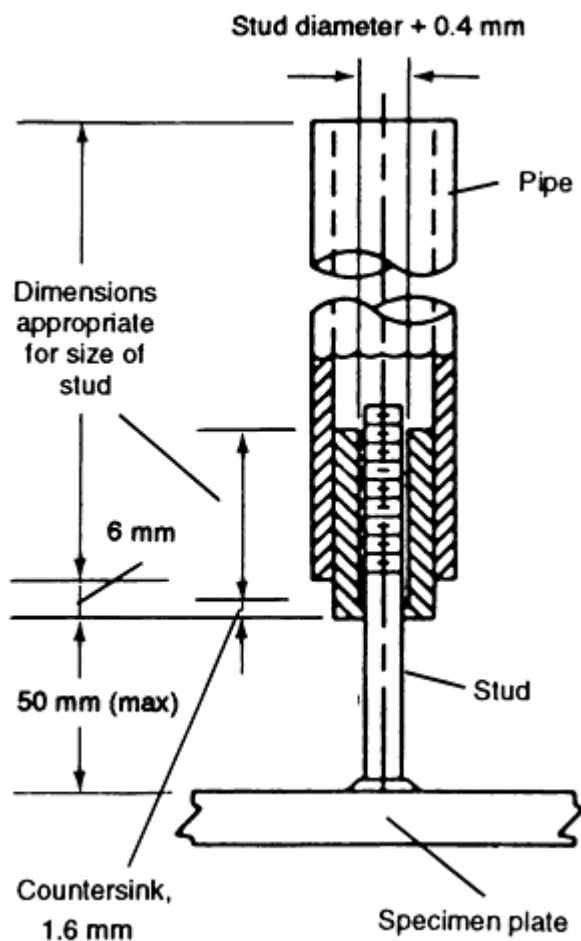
TYPICAL BEND TESTING SETUP. STUDS THAT MUST UNDERGO APPLICATION QUALIFICATION SHOULD BE BENT 90° WITHOUT WELD FAILURE (15° FOR ALUMINUM STUDS). TESTING FOR PREPRODUCTION OR TESTING DURING PRODUCTION FOR INSPECTION PURPOSES REQUIRES BEND TESTING TO 30° FROM ORIGINAL POSITION (15° FOR ALUMINUM STUDS). FOR THREADED STUDS, TORQUE TESTING PER FIG. 19 SHOULD BE USED. SOURCE: REF 2
